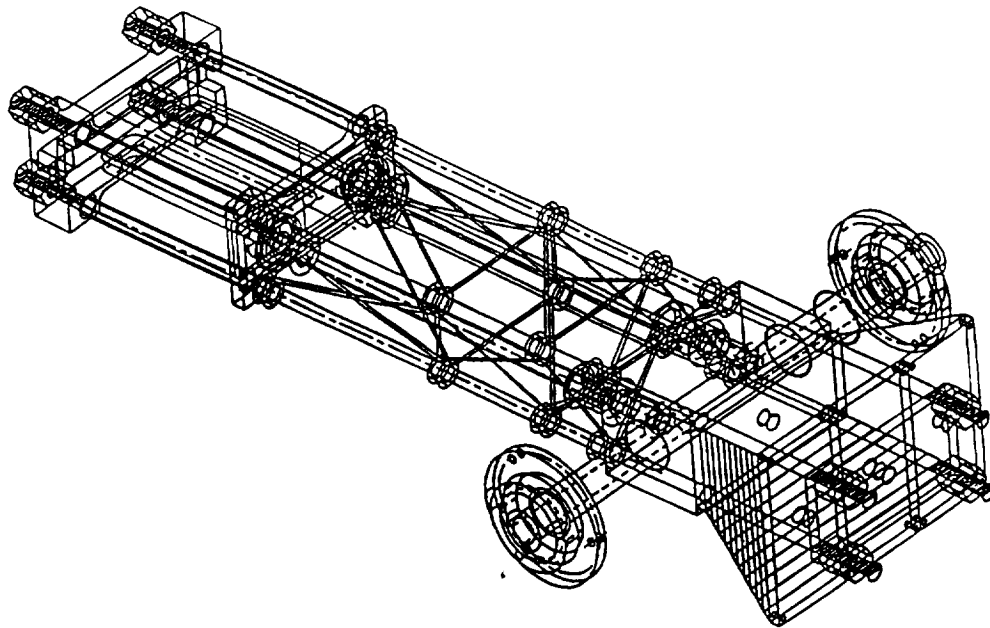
Isometric view assembly of the turbine-blade passage rig.
